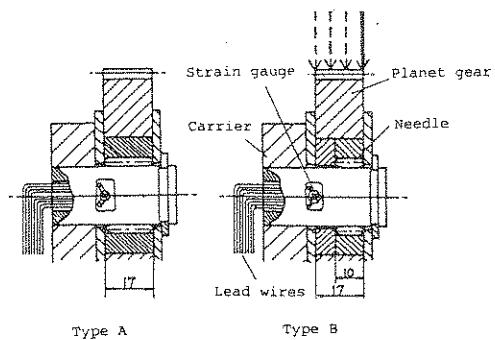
Mechanism of planetary gear bearing (Type A and Type B)
